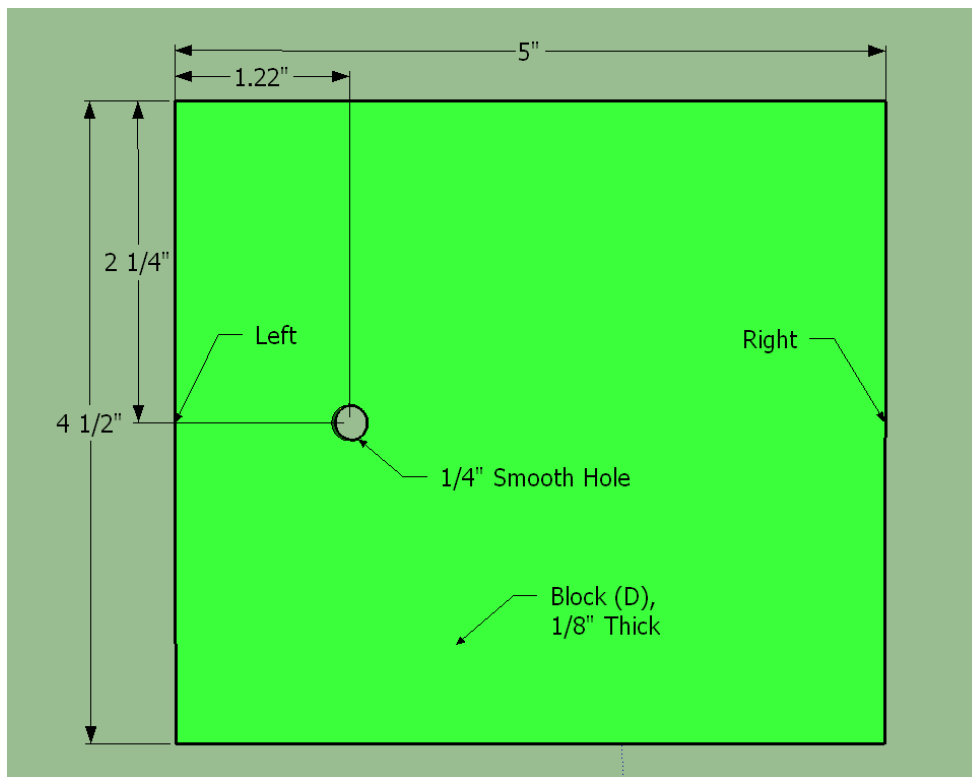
Block (D)- Sample Holder of Rectangular Specimens.
